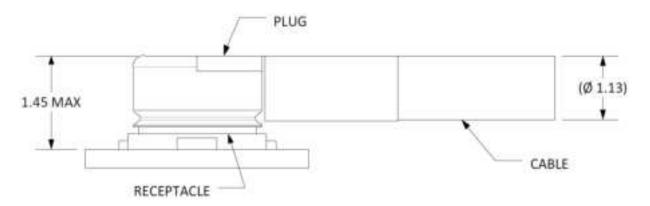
Space Factor of Mated Connectors (Ø 1.13 mm Coaxial Cables) (Unit: mm)
